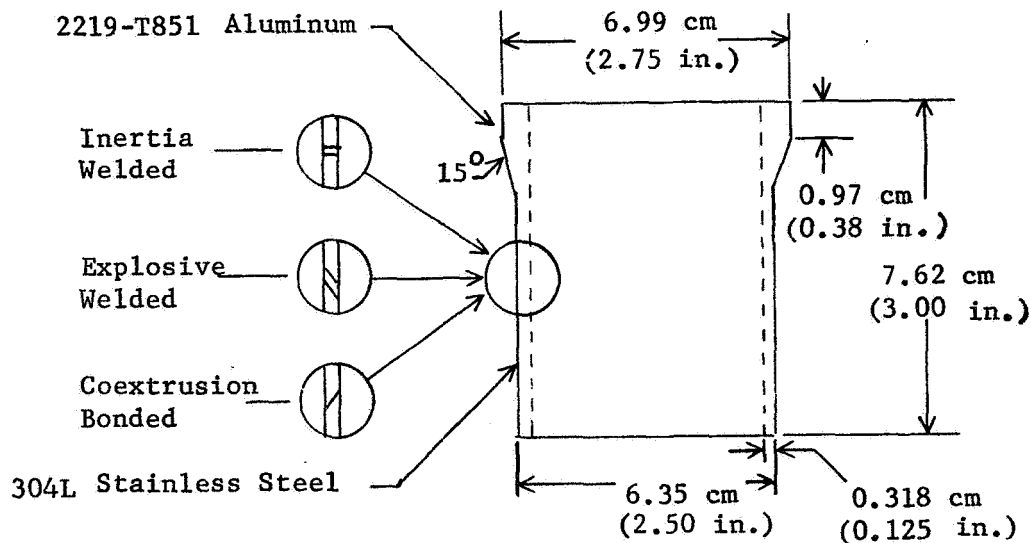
Joint Configuration - Inertia Welded, Explosive Welded, Coextrusion Bonded
